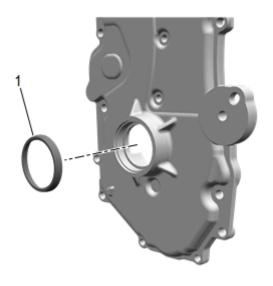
Front Crankshaft Seal Courtesy of GENERAL MOTORS COMPANY
